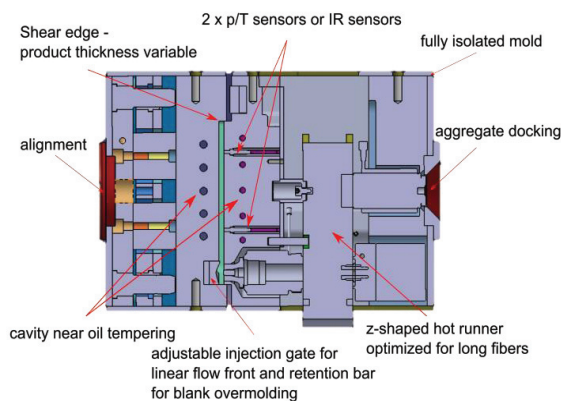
Mold 1 for hybrid plate manufacturing – Visualized is a section profile of the mold
